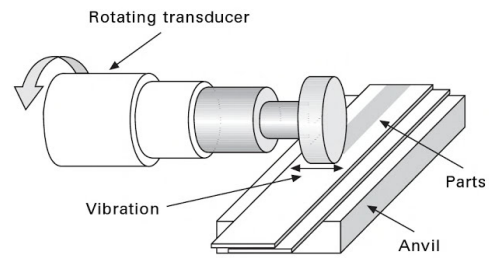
Ultrasonic Seam Welder (Ahmed 2005, 253)
